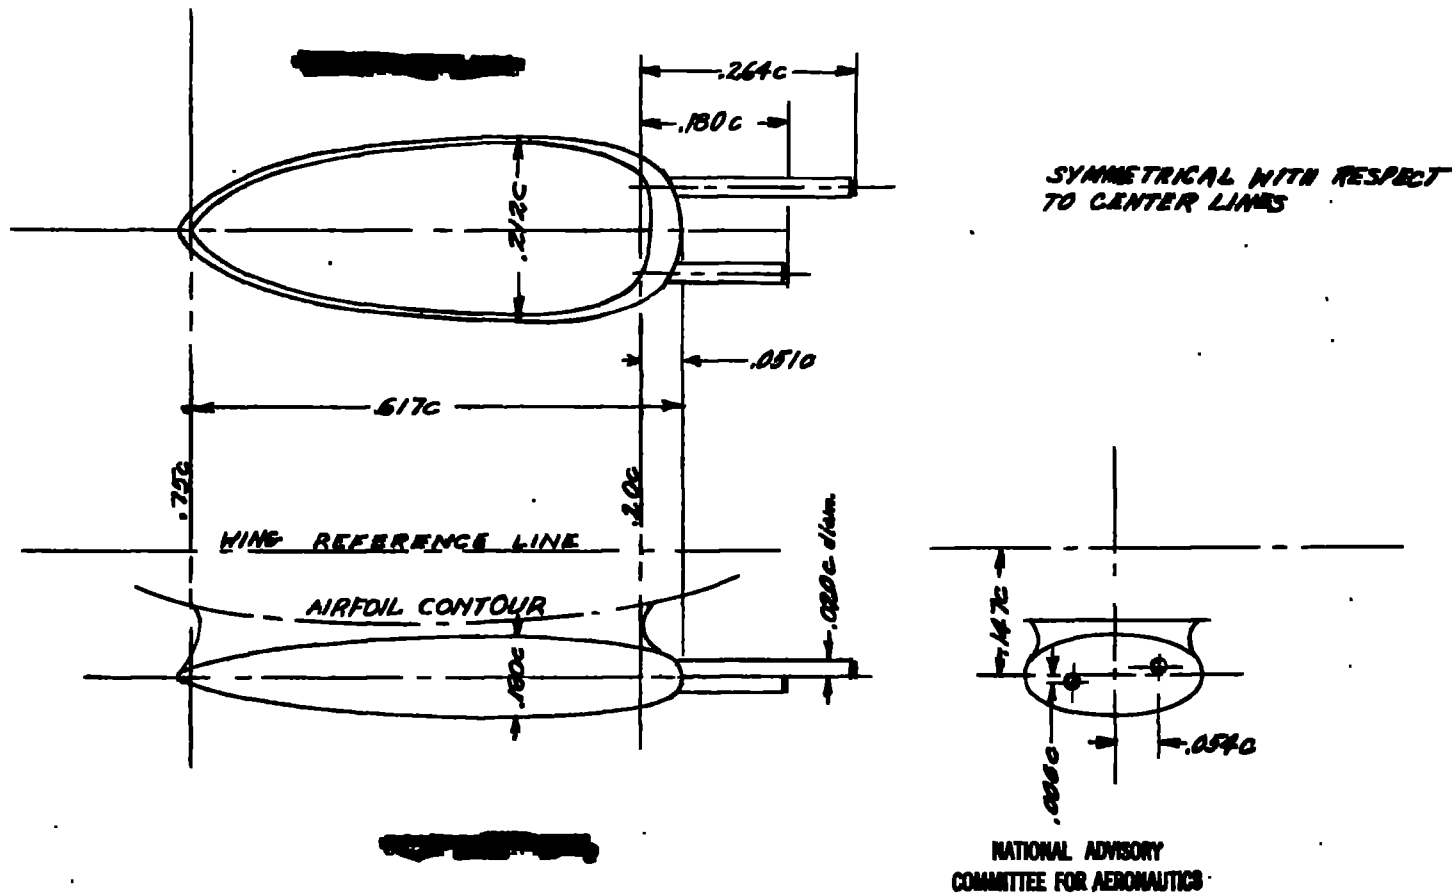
Machine-gun mount on model of XA-26 airplane.
